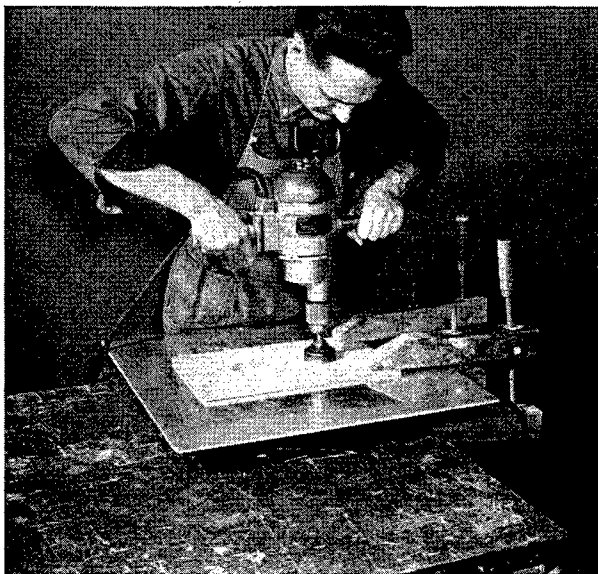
Steps in making an oval-shaped repair in a sandwich part having aluminum facings on end-grain balsa core.
